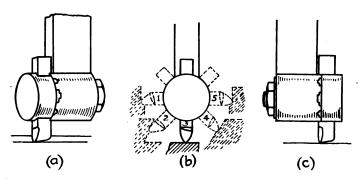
Armstrong planer or shaper tool. (a) Normal position for horizontal surface, (b) Tool arranged for (1) vertical cut; (2) angular cut, (inside angle); (3) horizontal cut; (4) angular cut; (5) vertical cut. (c) Tool holder (and tool bit) reversed, brings cutting edge back of shank of tool holder.
